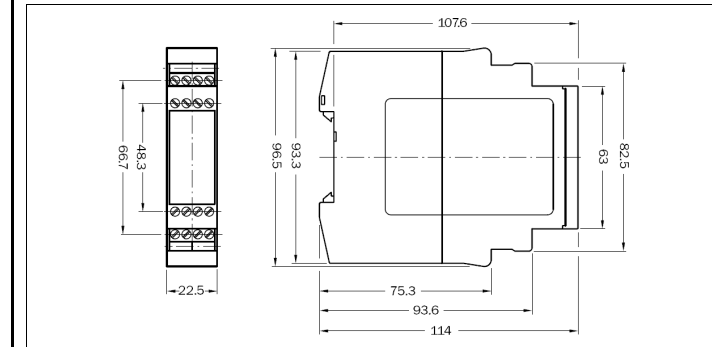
Dimensional drawing UE11-4DX with screw type terminals (mm)
